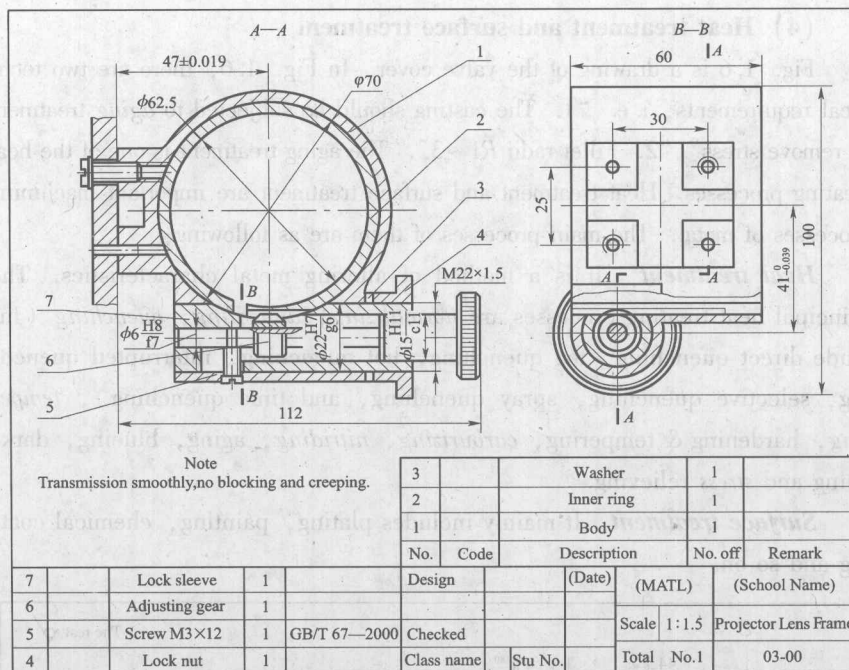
Assembly Drawing of a Projector Lens Frame
